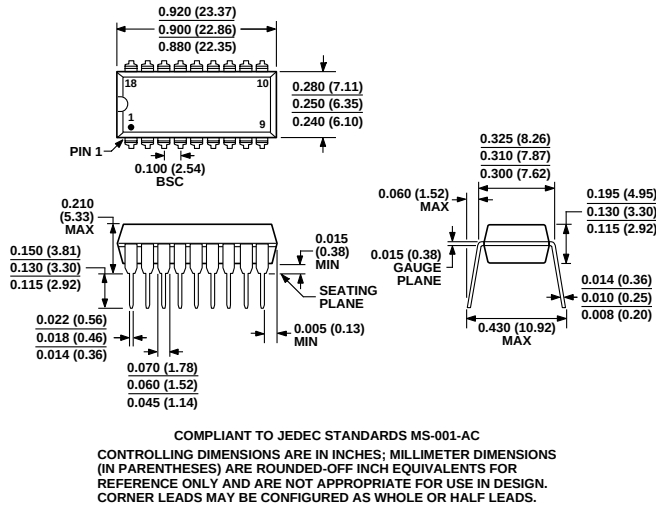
18-Lead Plastic Dual In-Line Package [PDIP]
